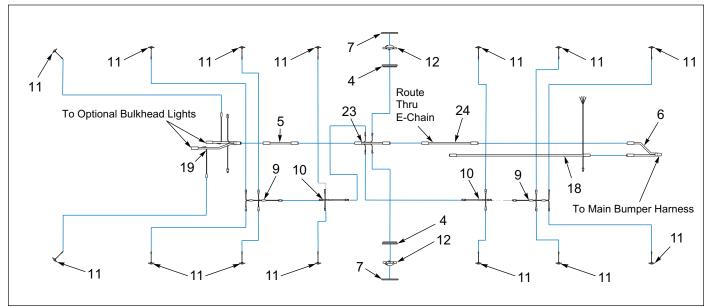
Long Bed Frame Assembly (2 of 2)
